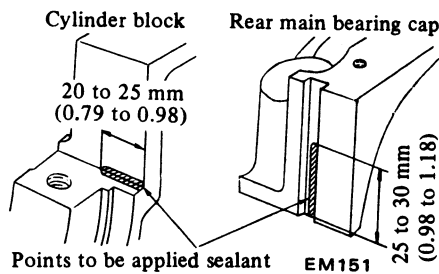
Applying Sealant (Main bearing cap and cylinder block)
